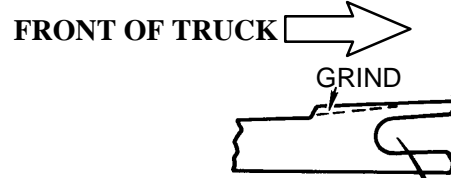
BRAKE ASSEMBLY – RIGHT
